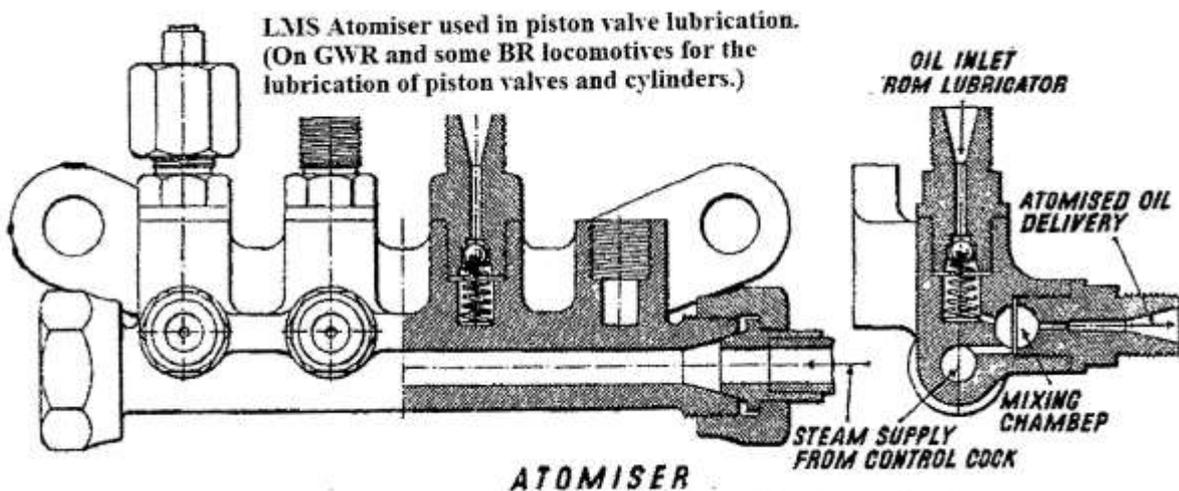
LMS Atomiser used in Piston Valve Lubrication.
